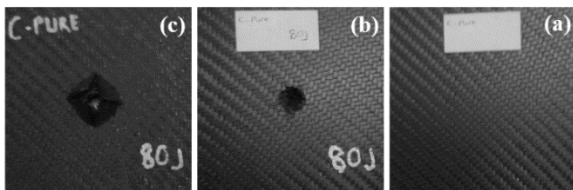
Carbon-fiber-epoxy composite impact test specimen, a) rough test specimen, b) front face of damaged specimen, c) back face of damaged specimen
